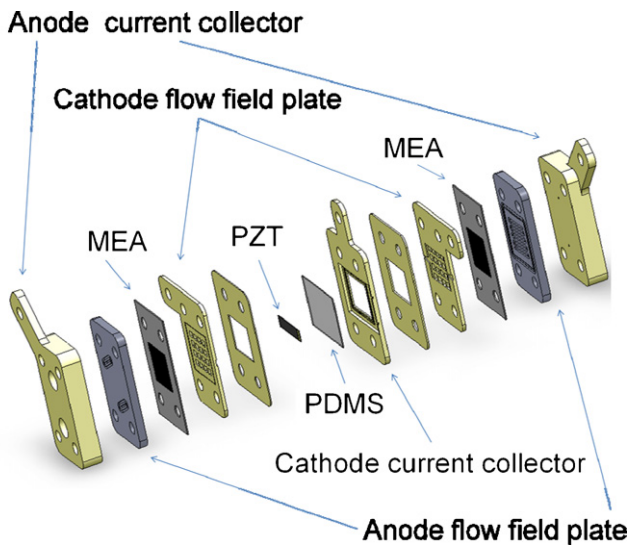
An exploded drawing of the PZT-PEMFC-ND bi-cell.
